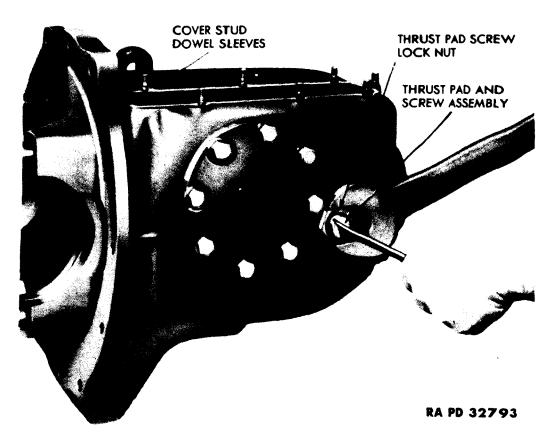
Adjusting Hypoid Drive Gear Thrust Pad
